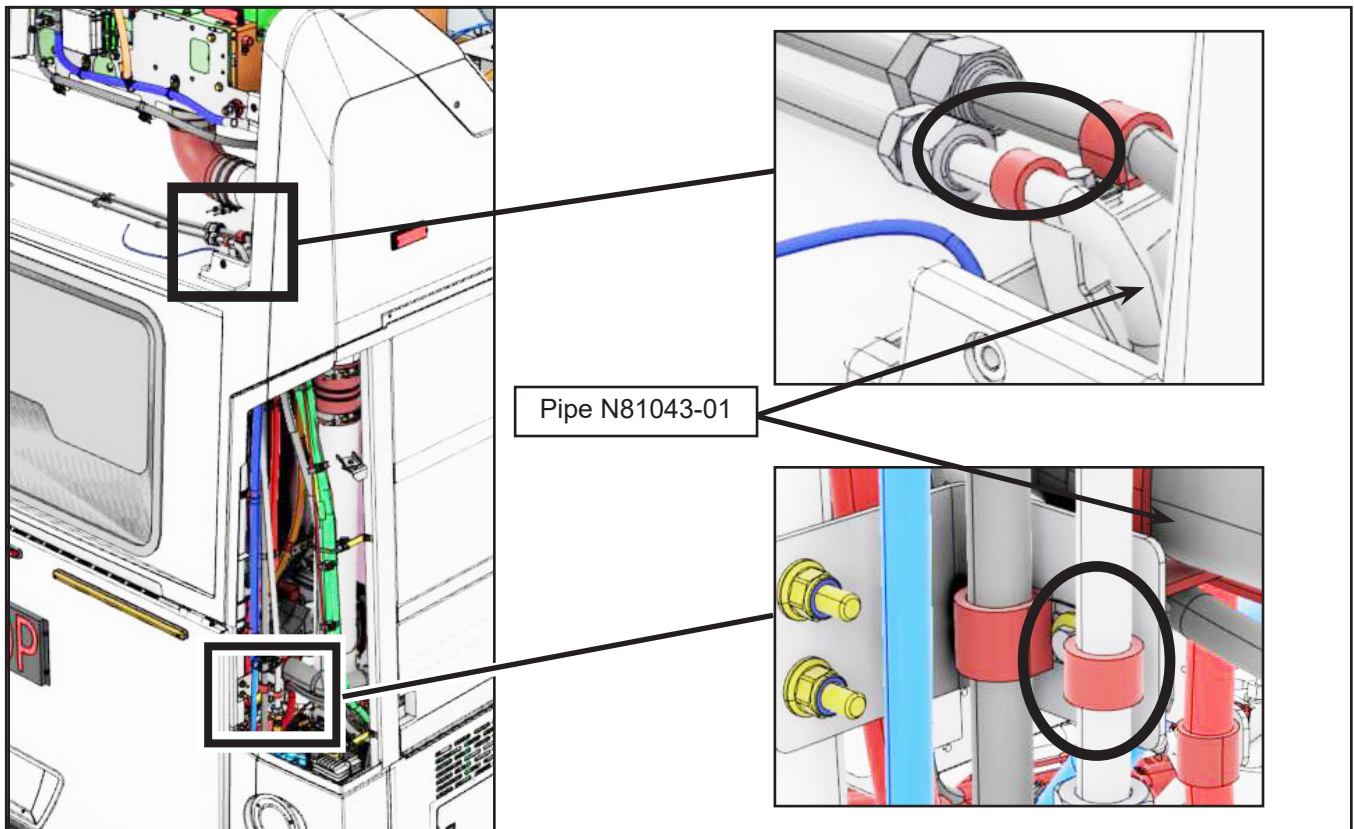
Remove P-Clamps to Free Pipe N81043-01
